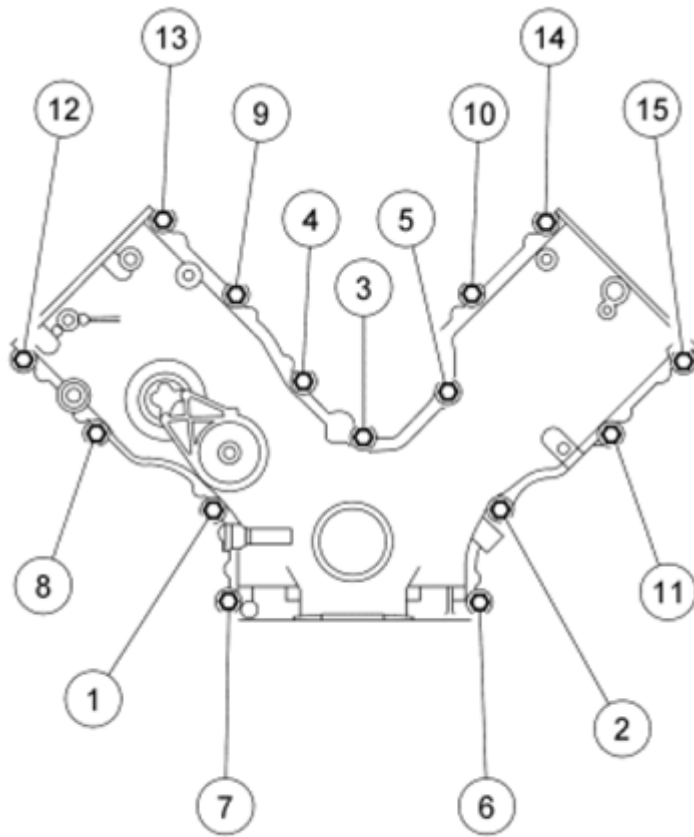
Installing Engine Front Cover Onto Dowels
